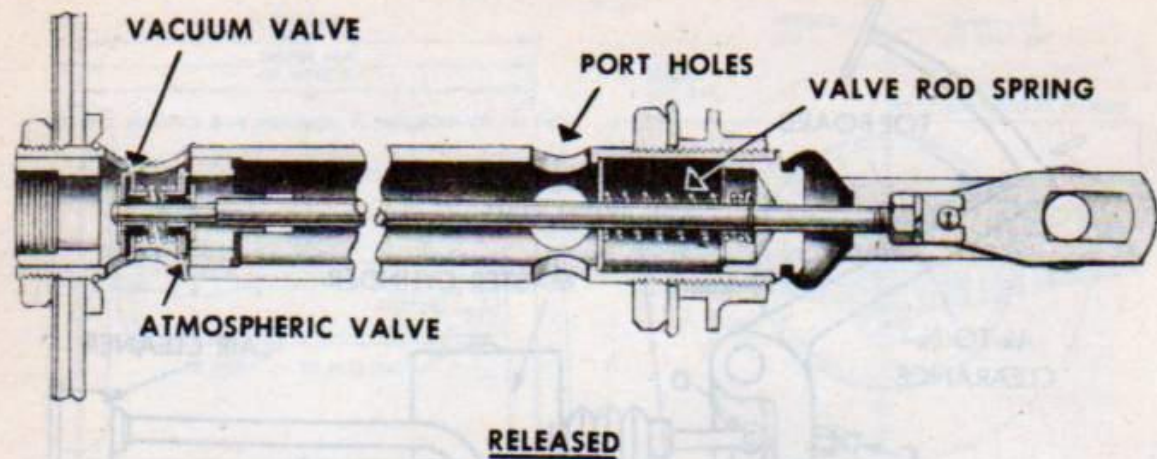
Vacuum Power Cylinder Valve Rod, Sectional Views
